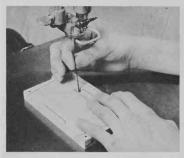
Threading jig saw blade for internal cutting. Detach blade from upper chuck and roll machine by hand until the blade is at its lower point before threading the blade through the work.
